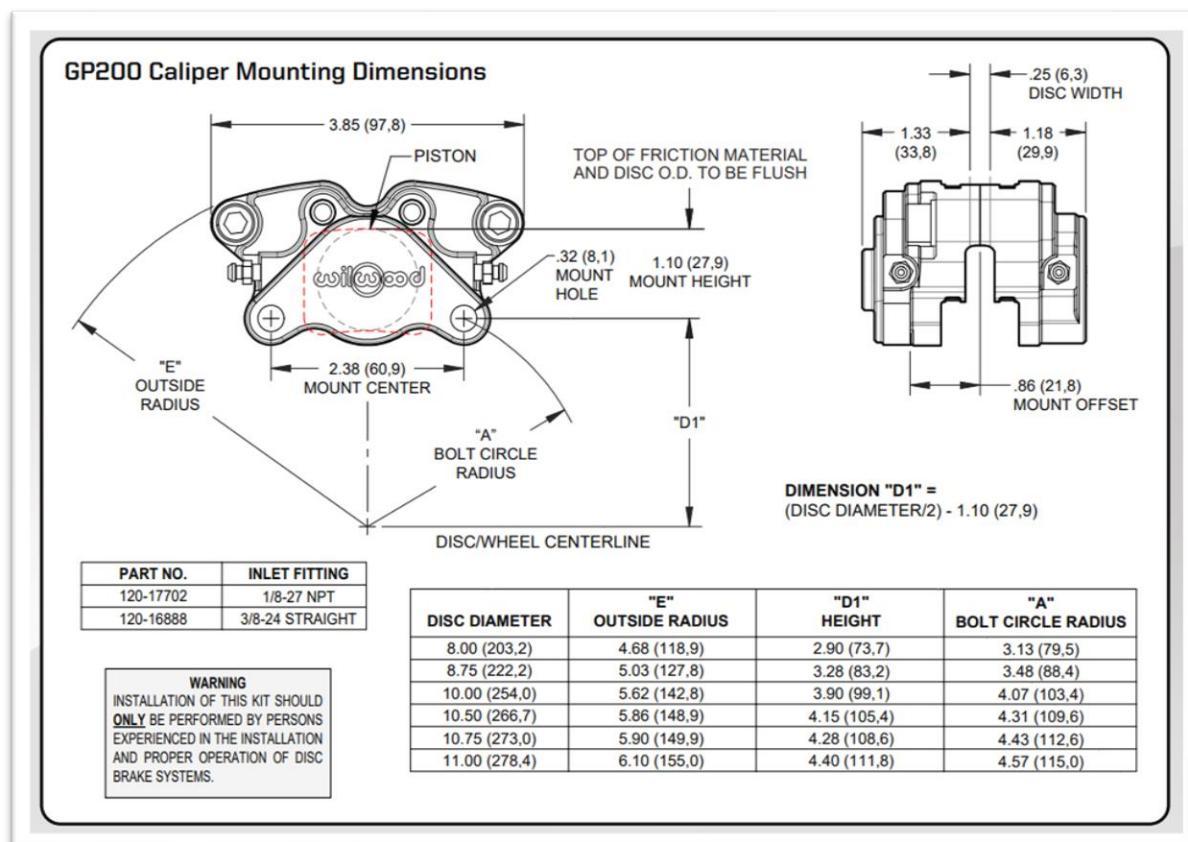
GP200 caliper mounting dimensions (Wilwood, 2024)
